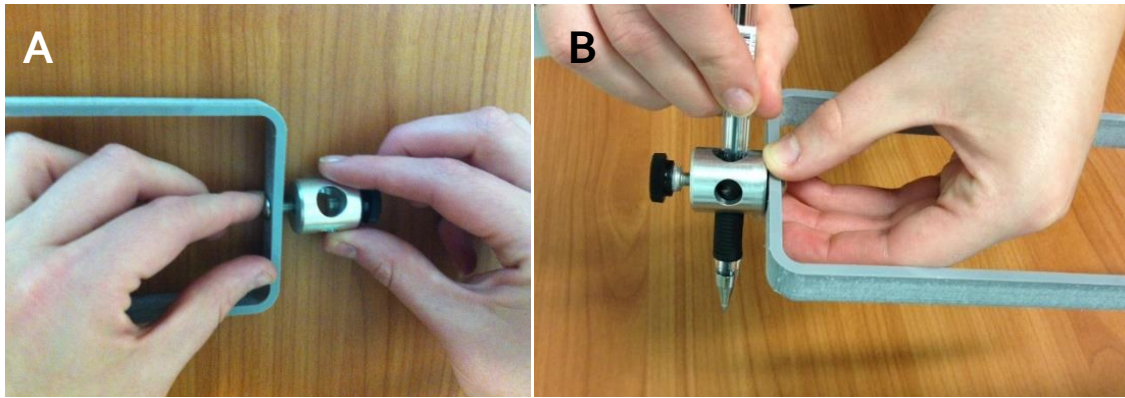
(A) Set-up for stylus holder: Stylus holder is attached to rod by screw inserted into the hole and tightened (B) Example of stylus in holder: Insert a stylus into the holder, secure into place by tightening the black screw.
